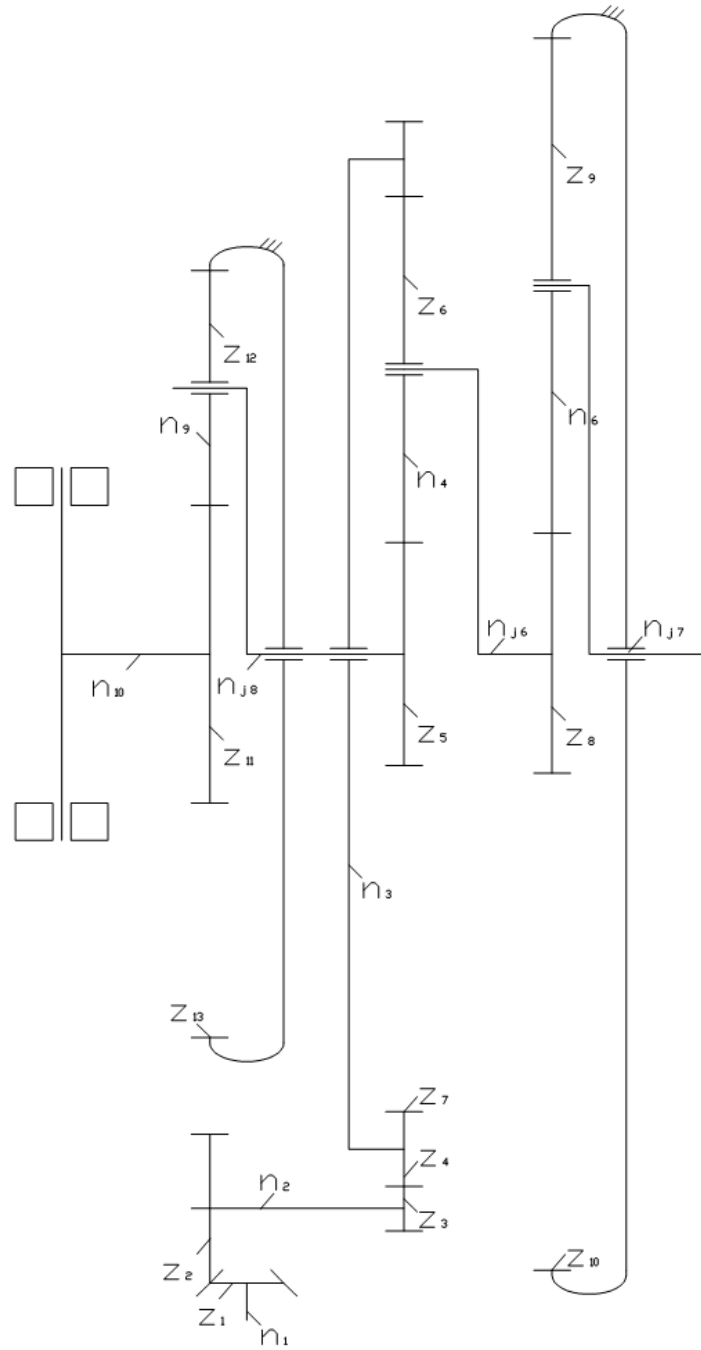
Scheme of driving system for bucket wheel of bucket wheel excavator with overload mechanism
